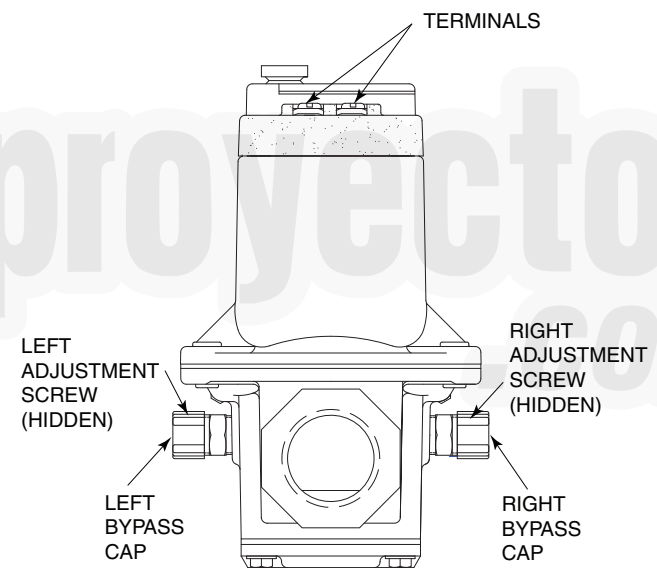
Modulating Gas Valve Bypass Adjustment
